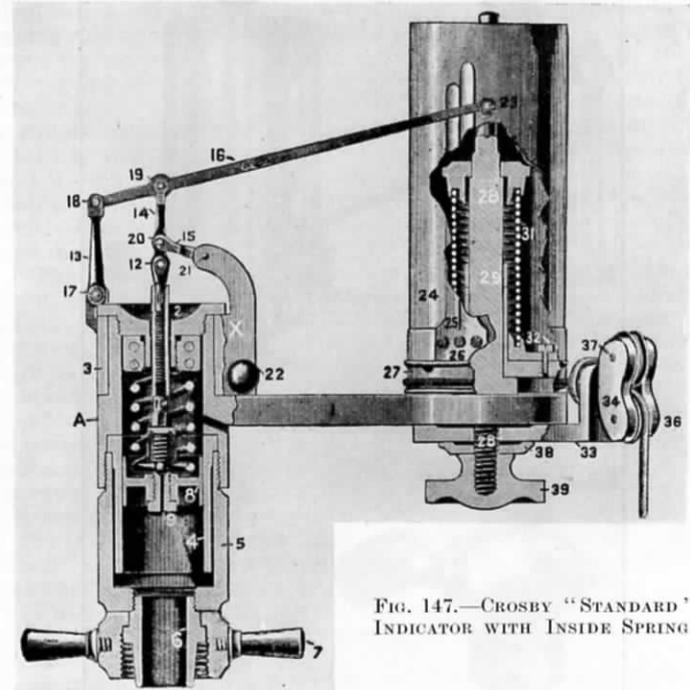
CROSBY "STANDARD" INDICATOR WITH INSIDE SPRING.
